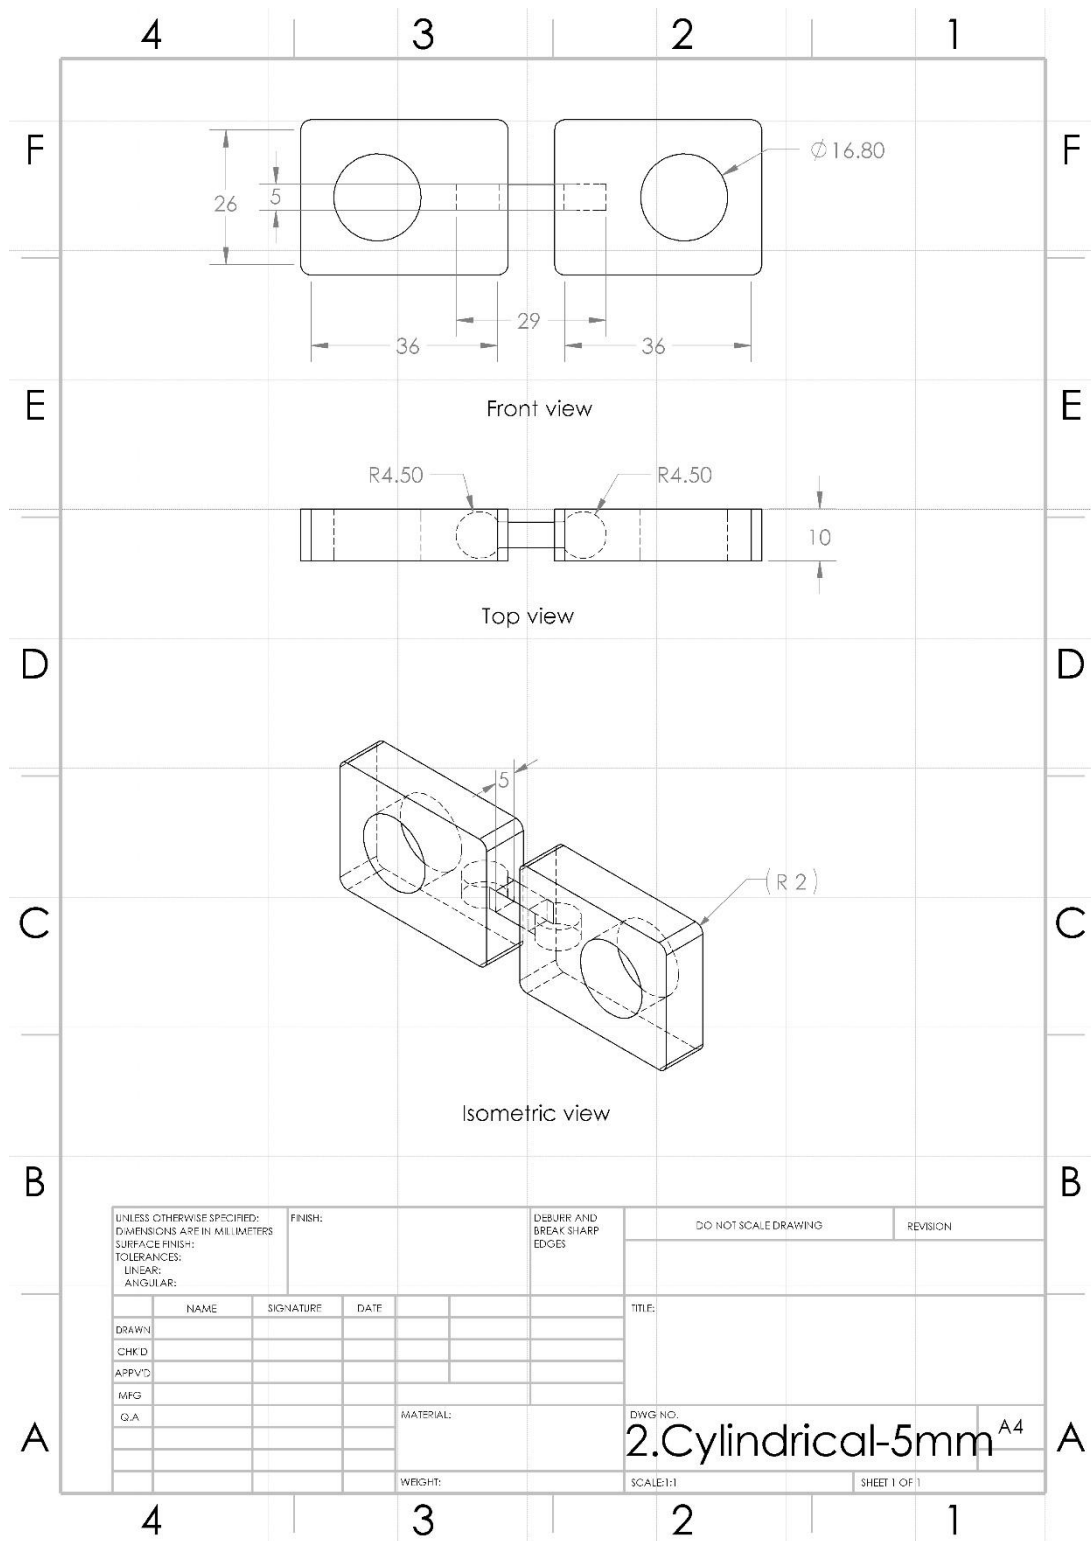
The technical drawing of the bi-material compliant mechanism with cylindrical-shaped interface in 5 mm thickness
